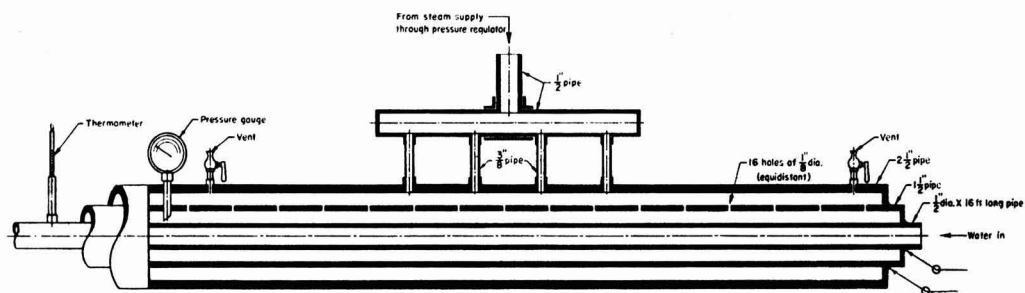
CONSTRUCTIONAL DETAILS OF HEAT EXCHANGER B
